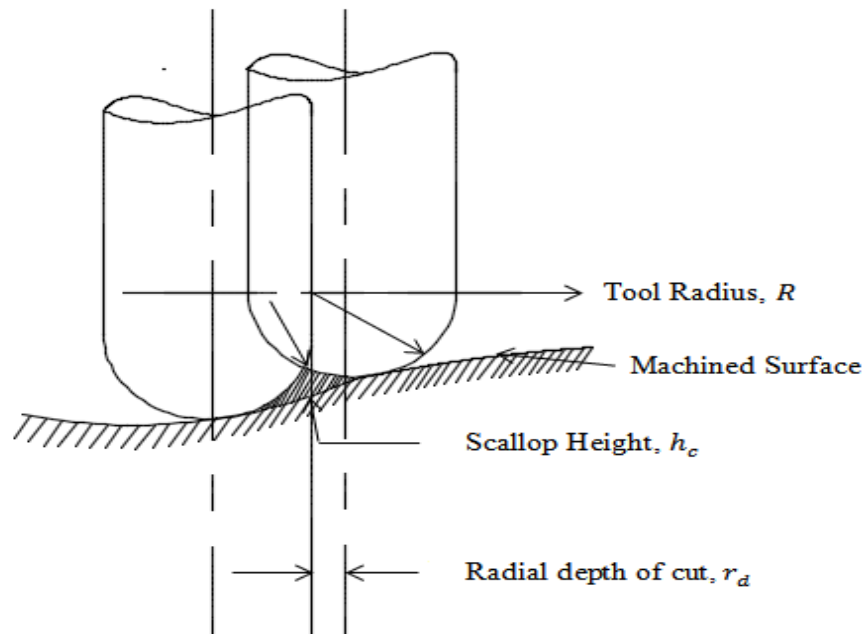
Relationship between the Tool radius, R and the Scallop height, h_c for a ball end mill.
